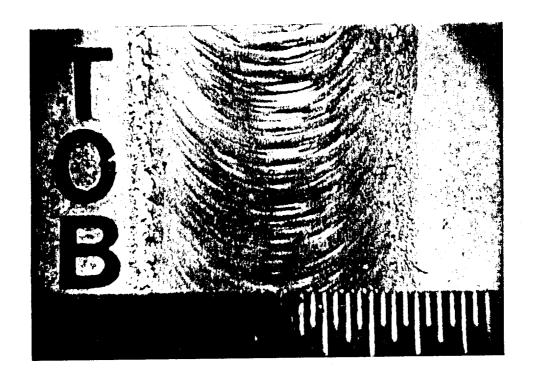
B Weld made with 500 ppm Hydrogen in shield. Keyhole. Back.
